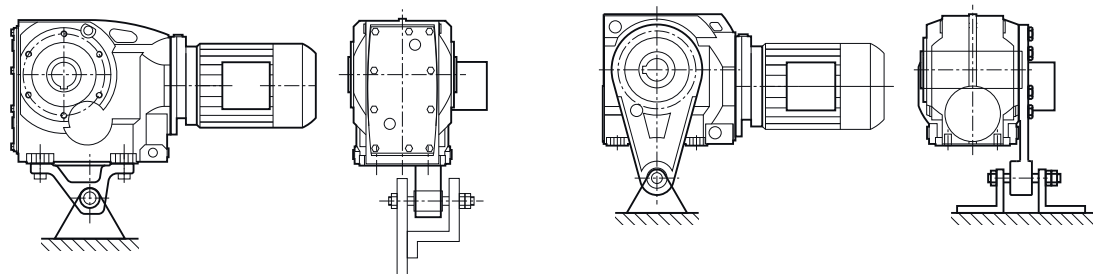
Mounting suggestion for torque arm on foot and flange
